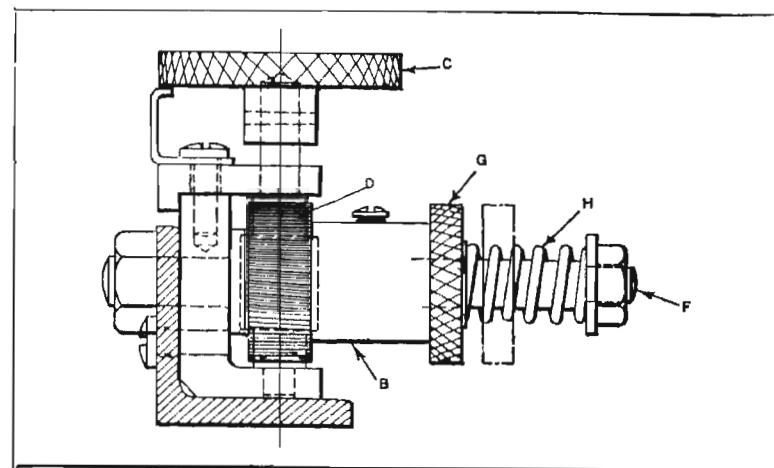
Worm-gearing Arranged for Quick Disengagement When Rapid Adjustment is Required
